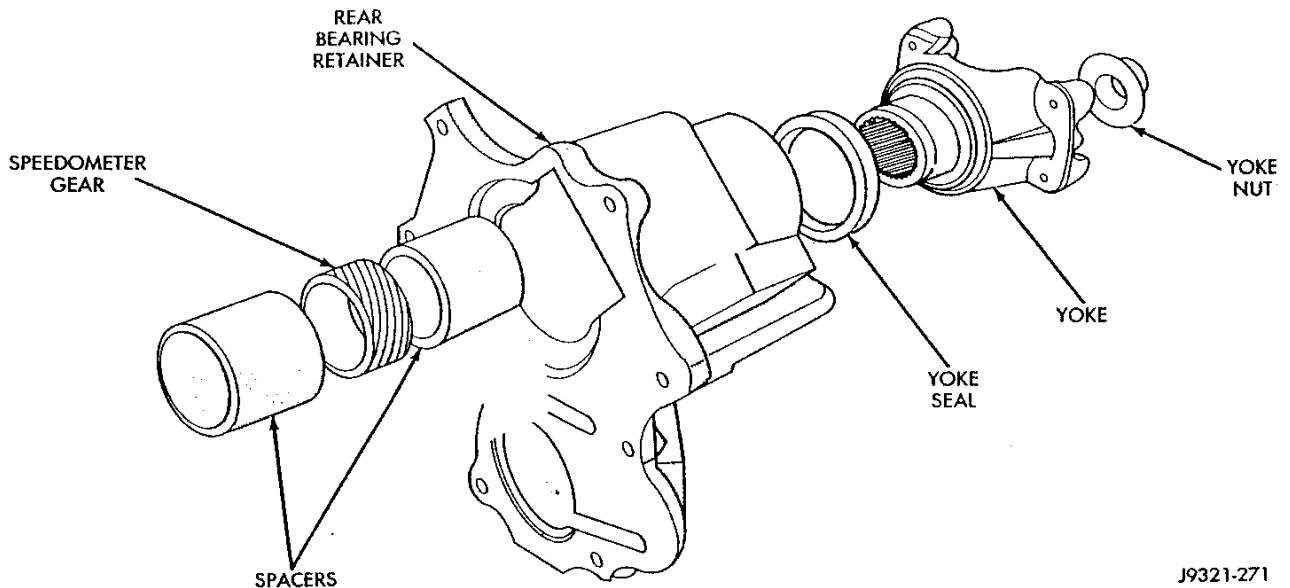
Two Wheel Drive Rear Bearing Retainer And Speedometer Gear
